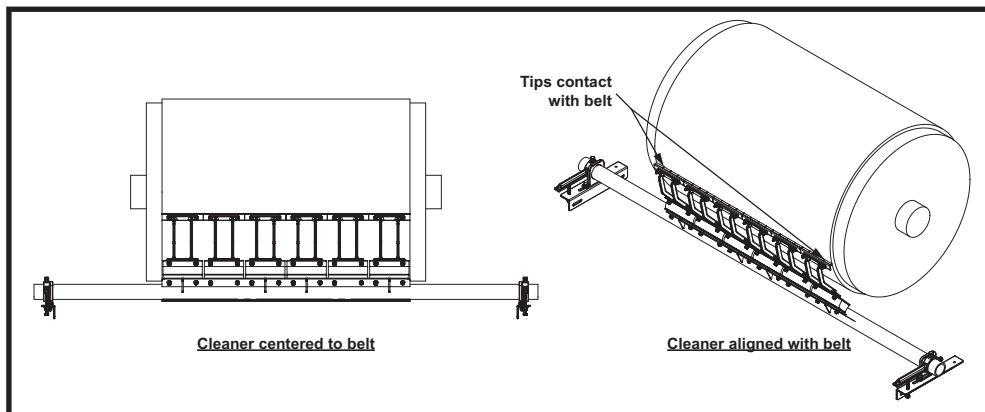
Martin® H1 Primary Belt Cleaner HD Tip Contact
